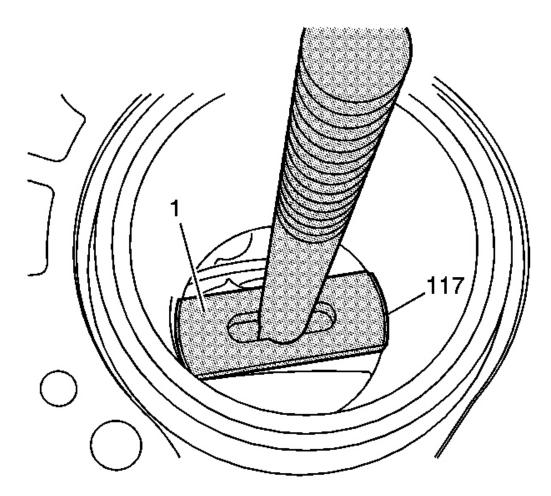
View Of Cylinder Bore Liner Puller Courtesy of GENERAL MOTORS CORP.
